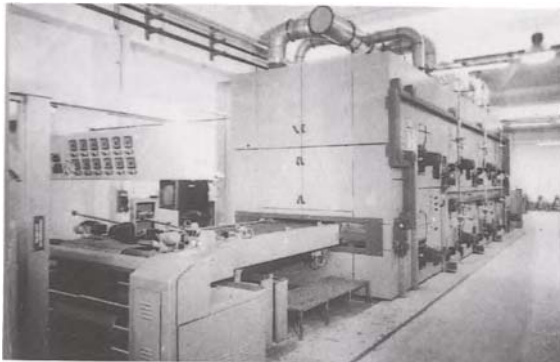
Multi-layer stentering machine (Courtesy of Bruckner GmbH).
